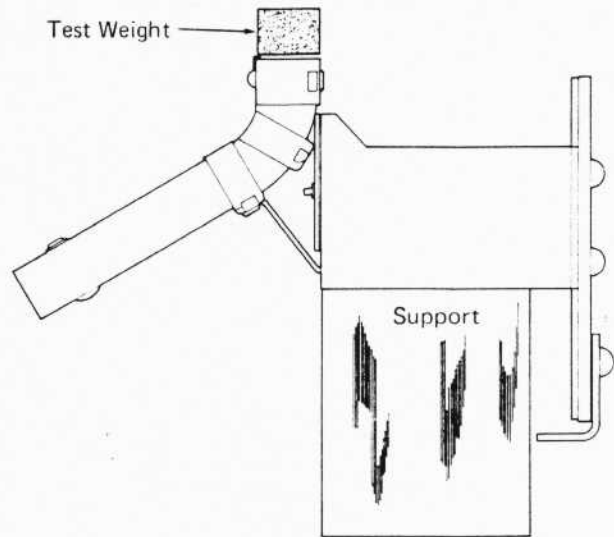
Testing Narrow Window Wick Lubricator Spring
